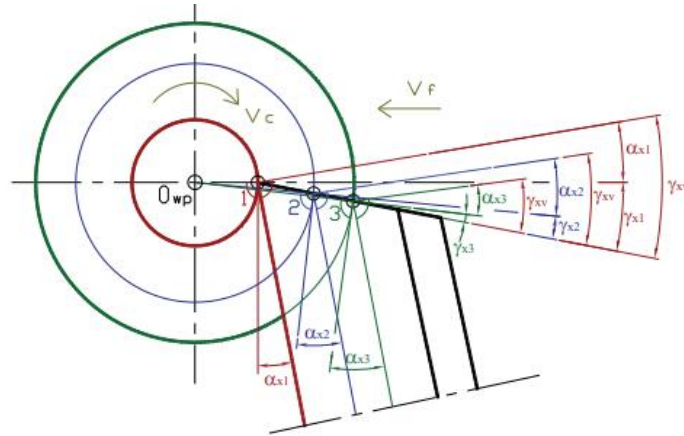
Geometric parameters of a forming tool relative to the workpiece [26]
